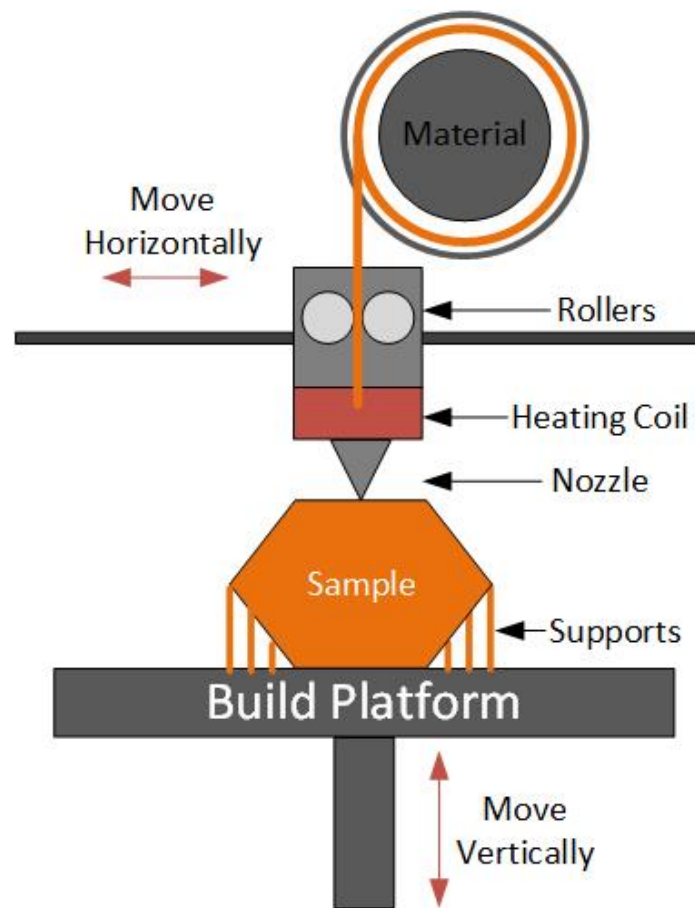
Schematic of the material extrusion additive manufacturing technology
